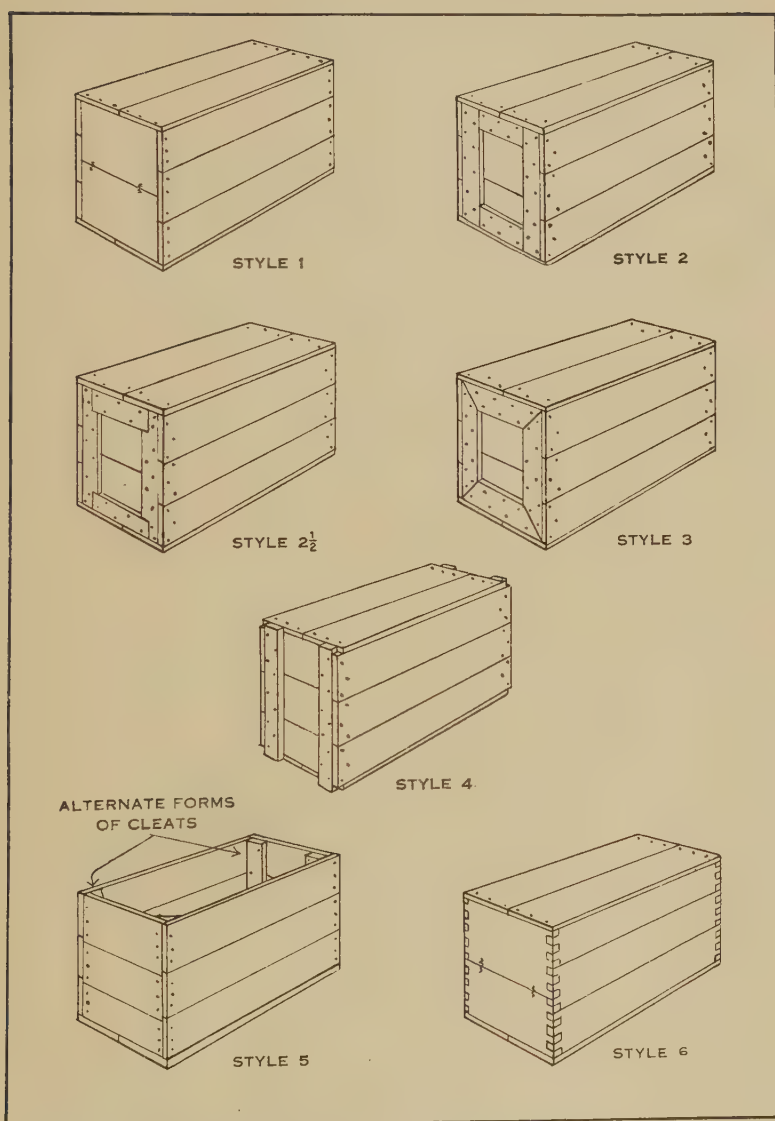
Styles of wooden boxes, nailed and lock-corner construction.
